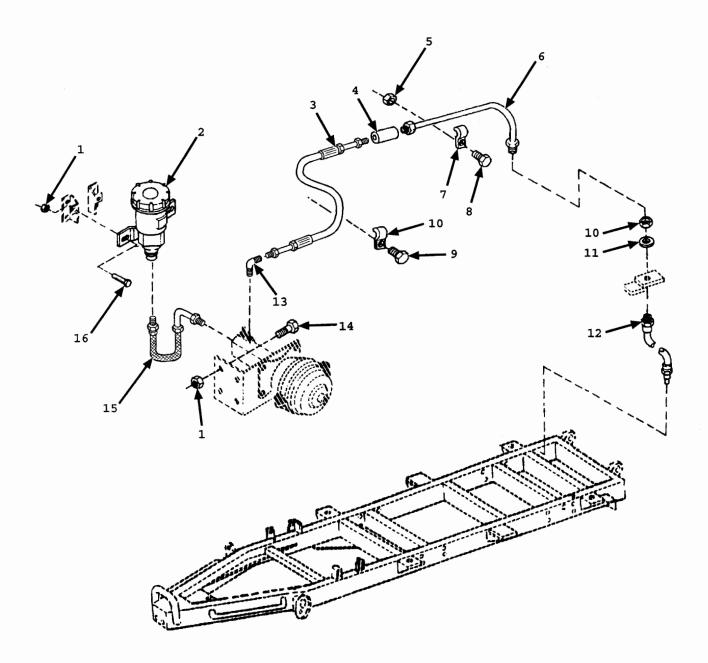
Front Hydraulic Brake Lines, Hoses, and Fittings
